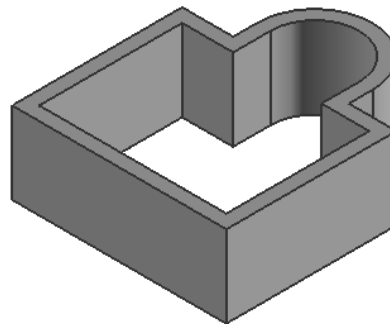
Preview of the extrusion tapered using the Asymmetric option
